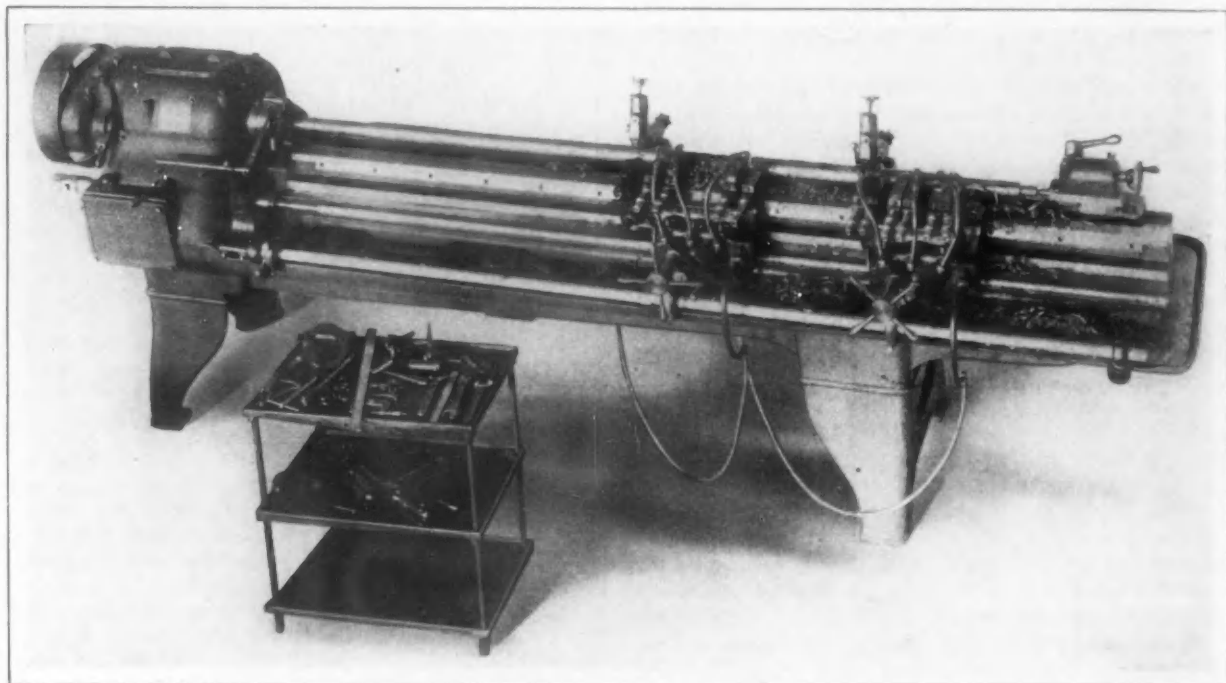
The Improved Type of Lo-Swing Lathe for Small Diameter Work
